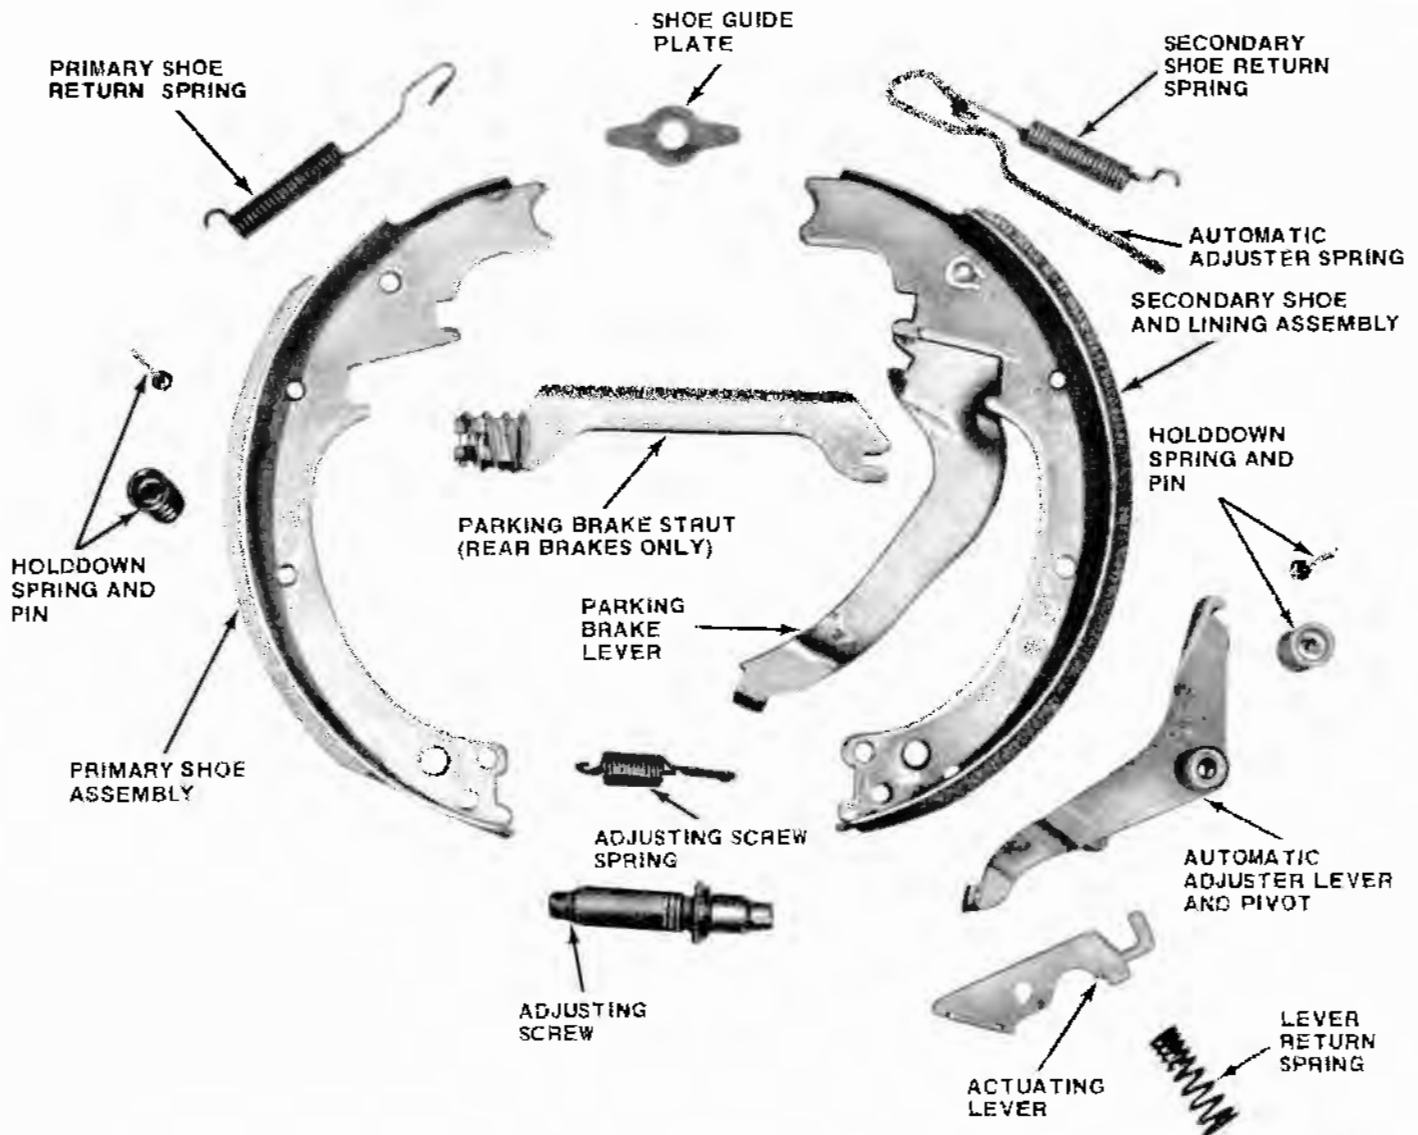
Disassembled Drum Brake Assembly - Cherokee, Wagoneer, Truck (Rear Brake Shown)
